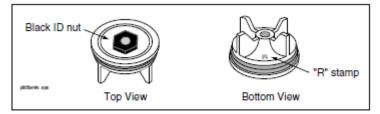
Identifying A FE Petro "R" Style Precision Check Valve
